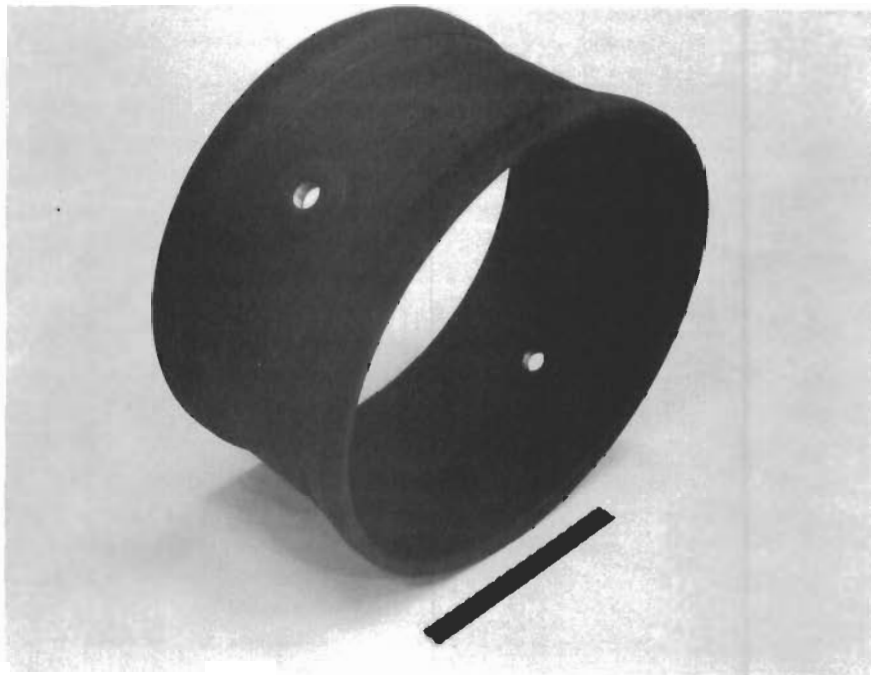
Rubber-Covered 49 x 17 Rim-Locking Assembly
